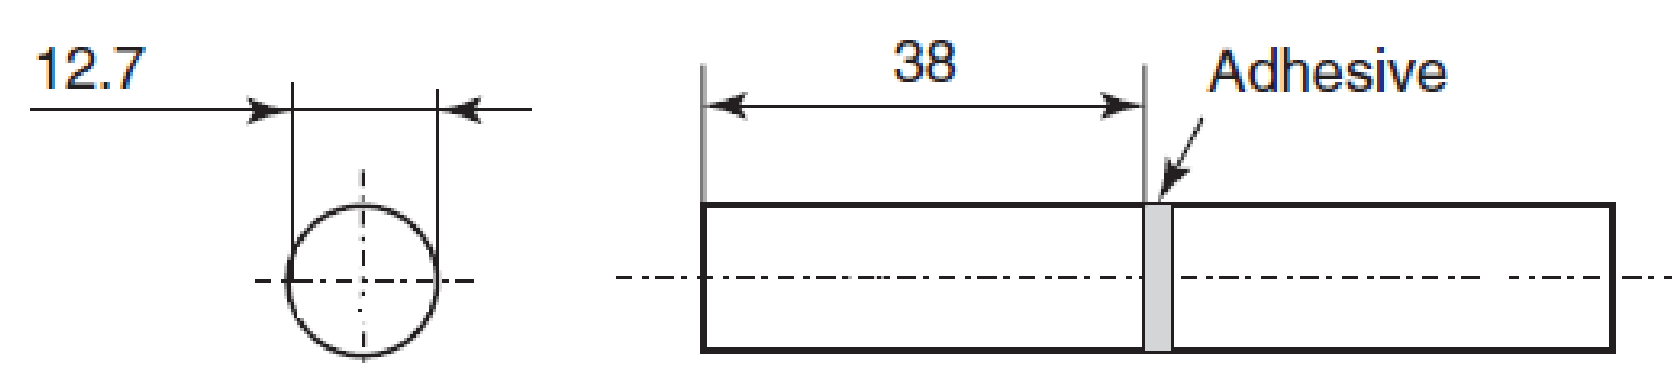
Butt specimen geometry (dimensions in millimetres).
